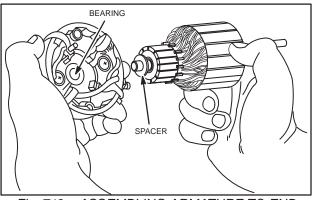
ASSEMBLING ARMATURE TO END CAP
